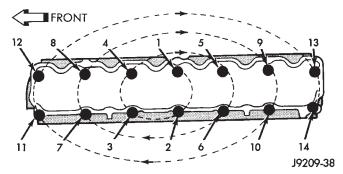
Engine Cylinder Head Bolt Tightening Sequence
